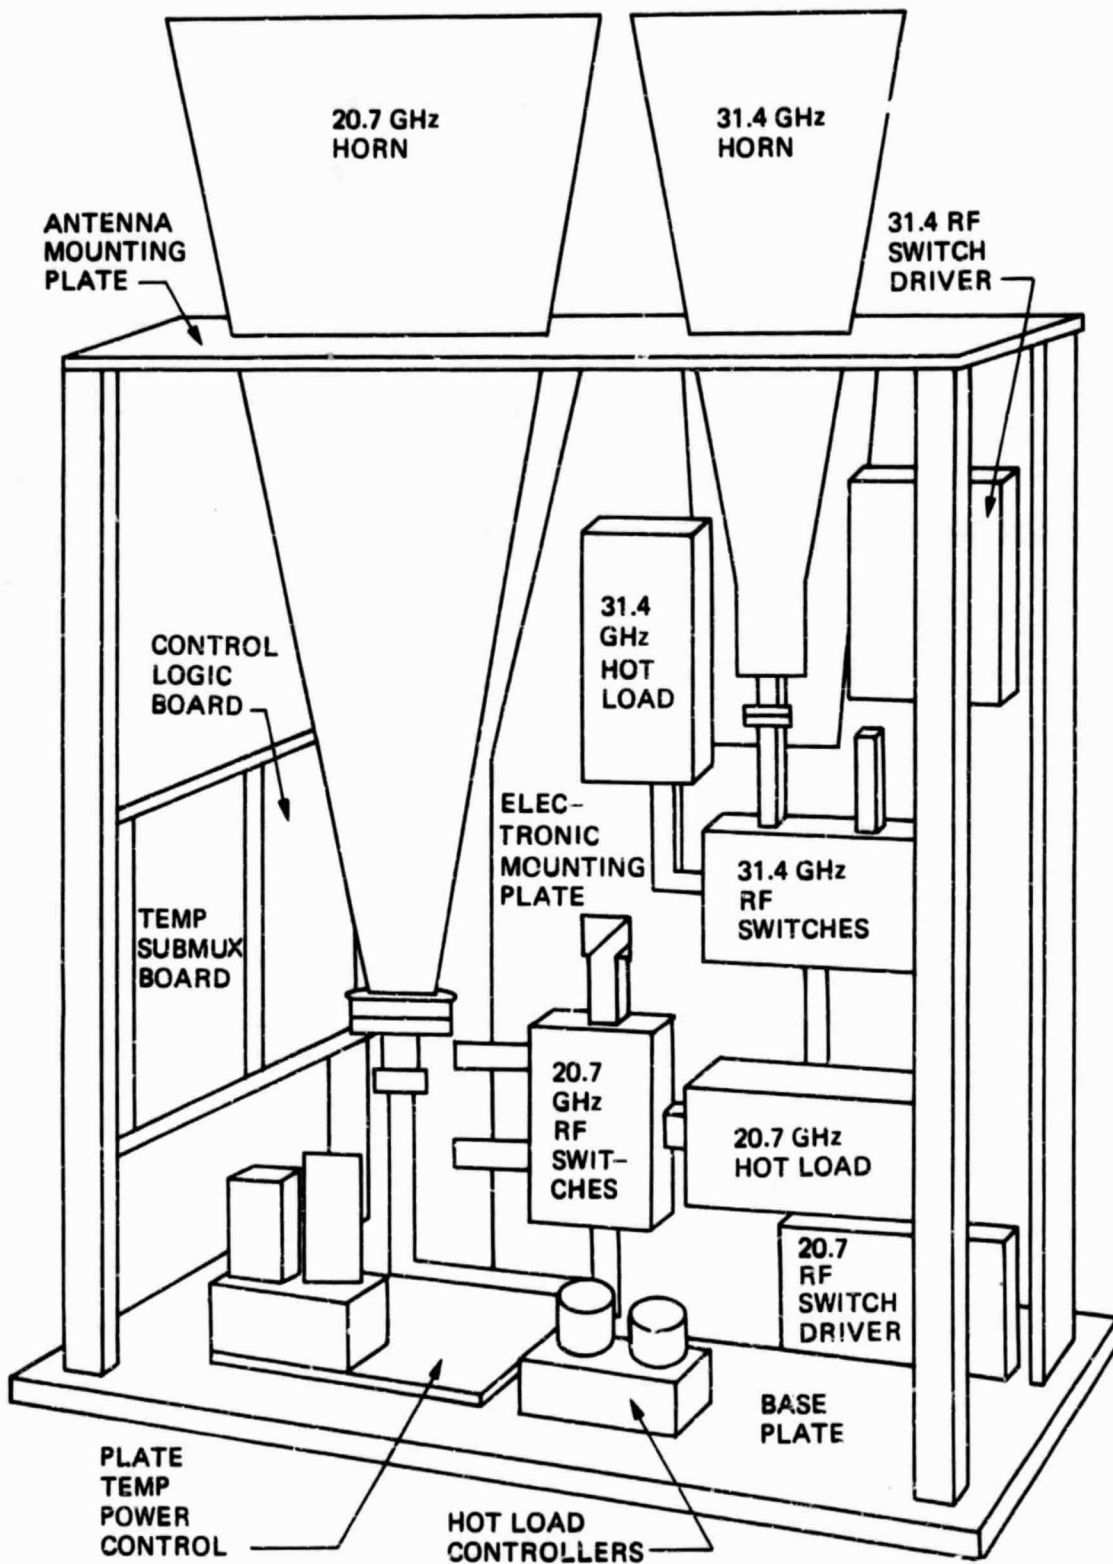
Microwave Module Mechanical Layout (Sheet 1 of 2)
